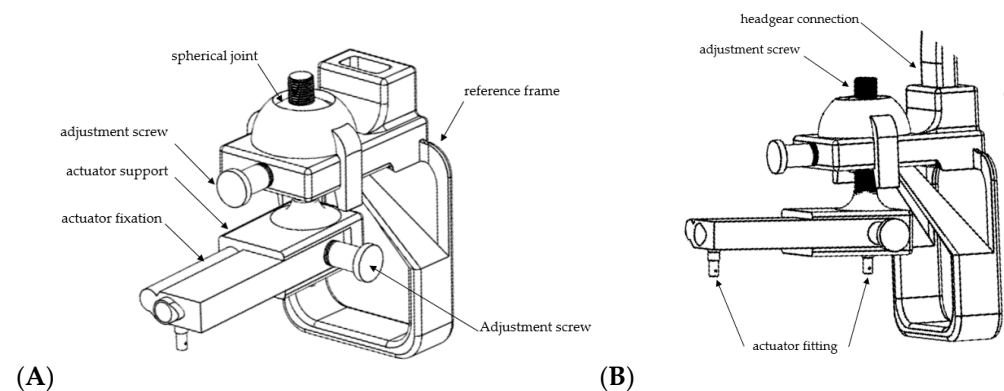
Video otoscope support components for angular positioning (A) and longitudinal axis fitting (B).
